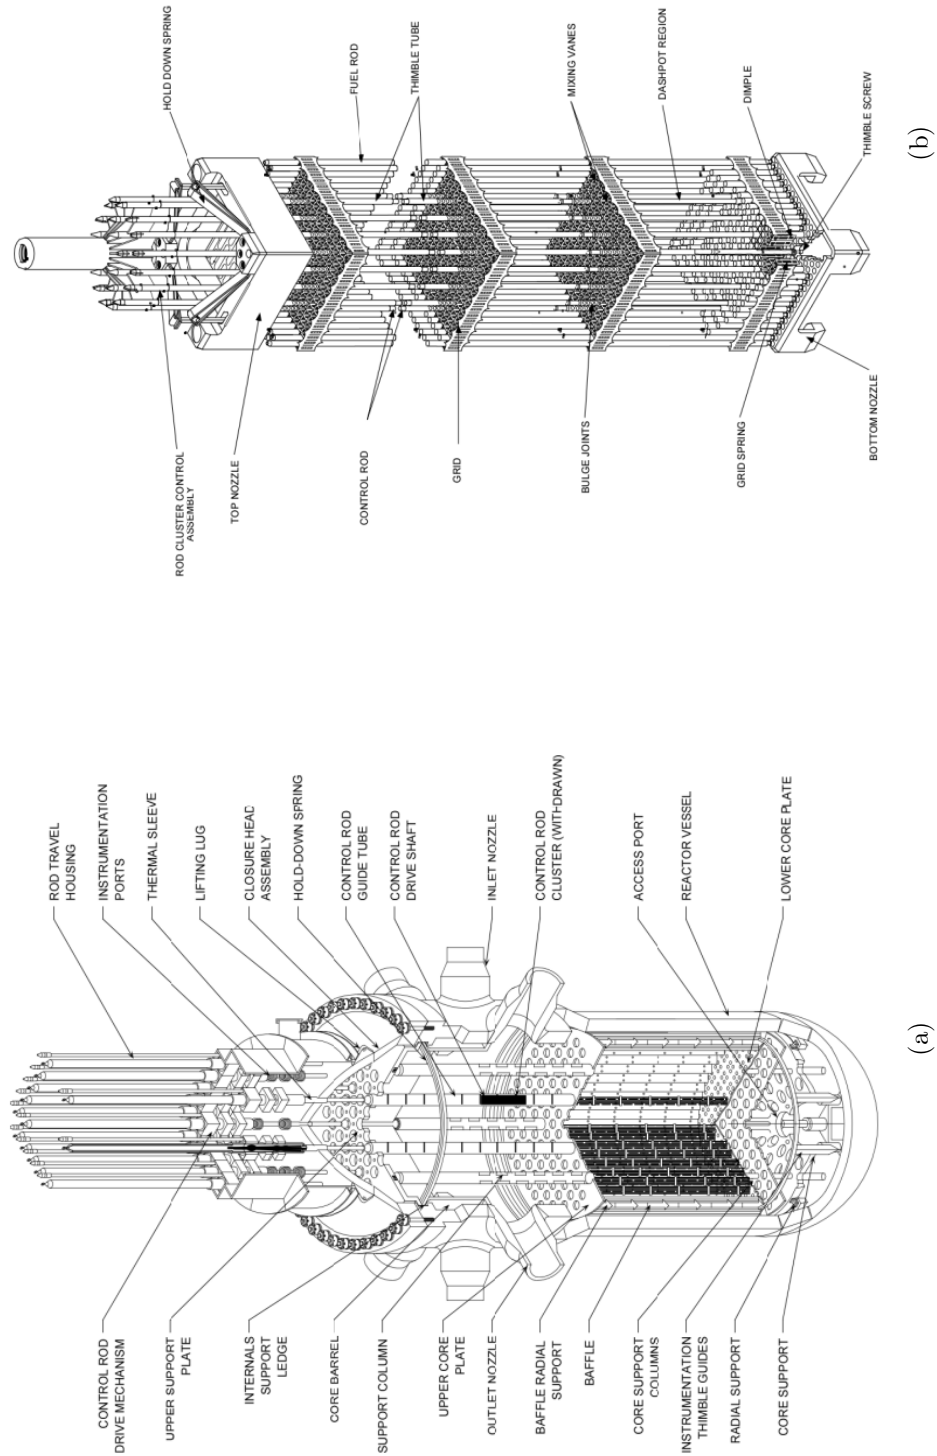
PWR vessel internal schematic view (a) and PWR fuel assembly schematic view [USNRC, 2012].
